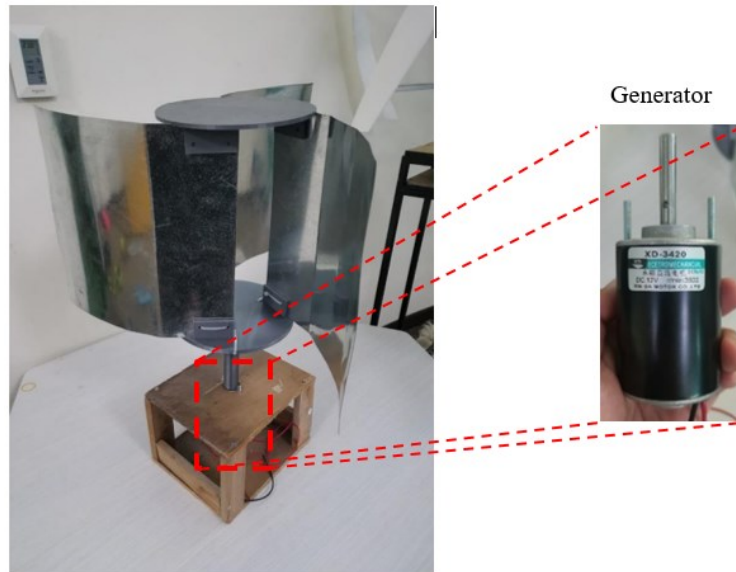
Final Fabrication and Assembly of VAWT Prototype
